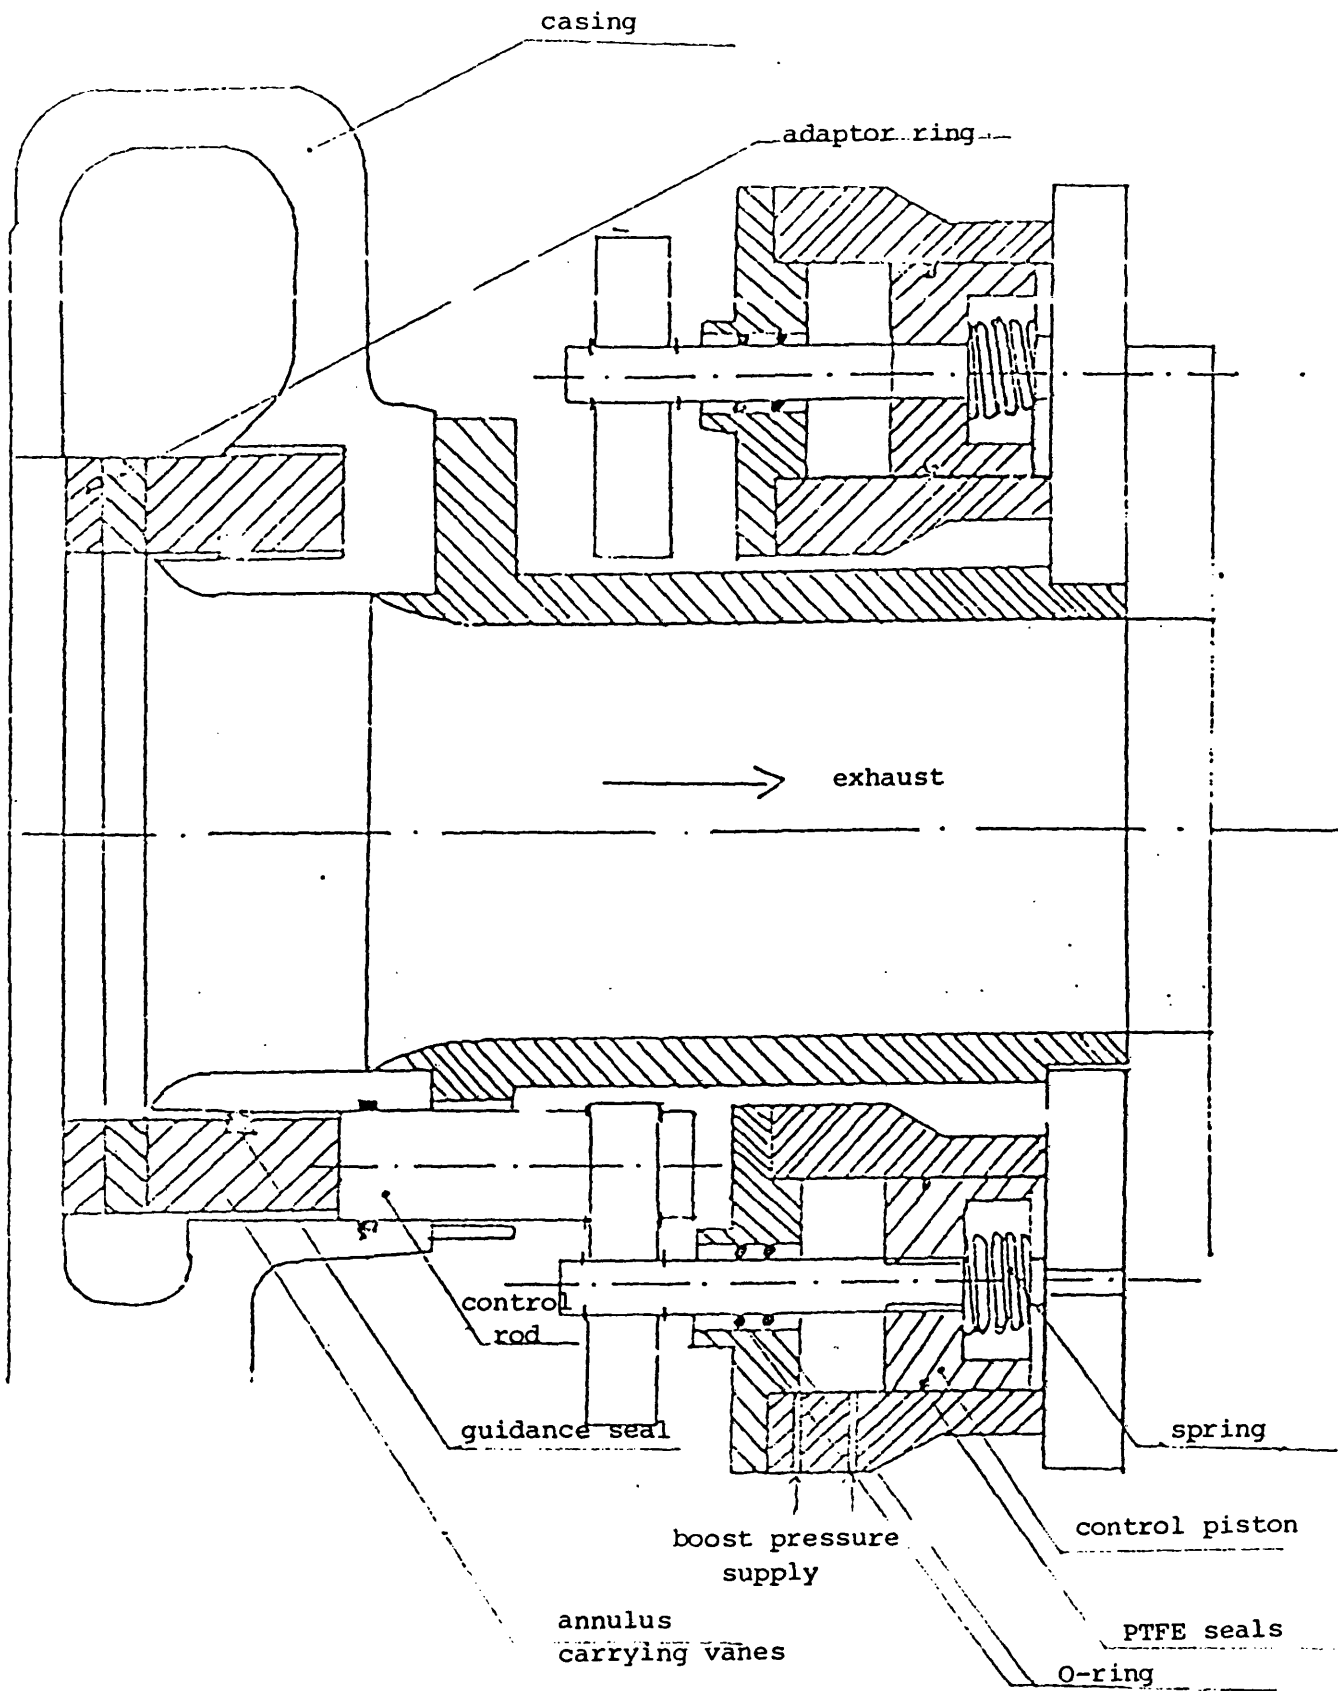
Schematic of Variable Geometry Turbine Assembly.
